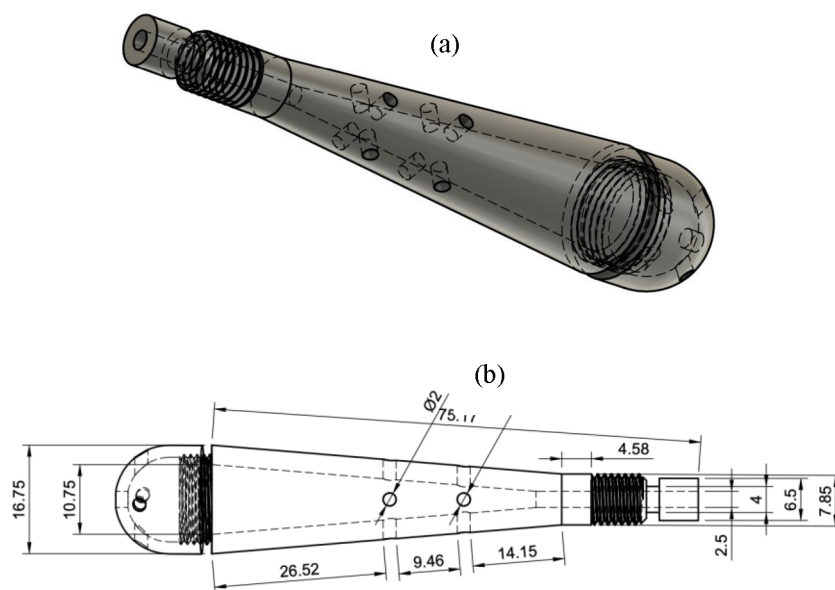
Design of the C-AICD funnel, (a) isometric view of the 3D CAD model, (b) detailed 2D drawing with dimensions.
